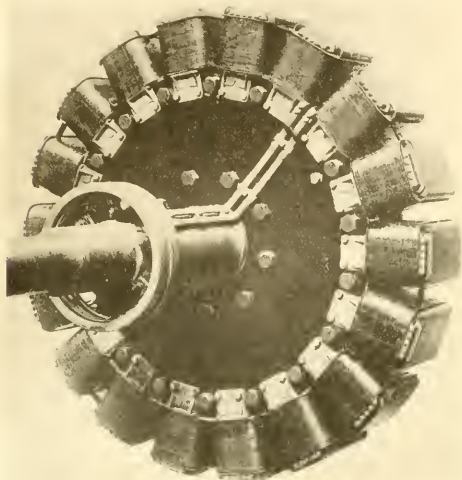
PLATE SPIDER BUILT UP OF HOT-ROLLED OPEN-HEARTH STEEL PLATES
